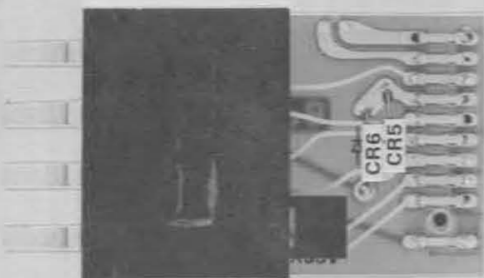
A8. Trigger Mode Switch circuit board.
